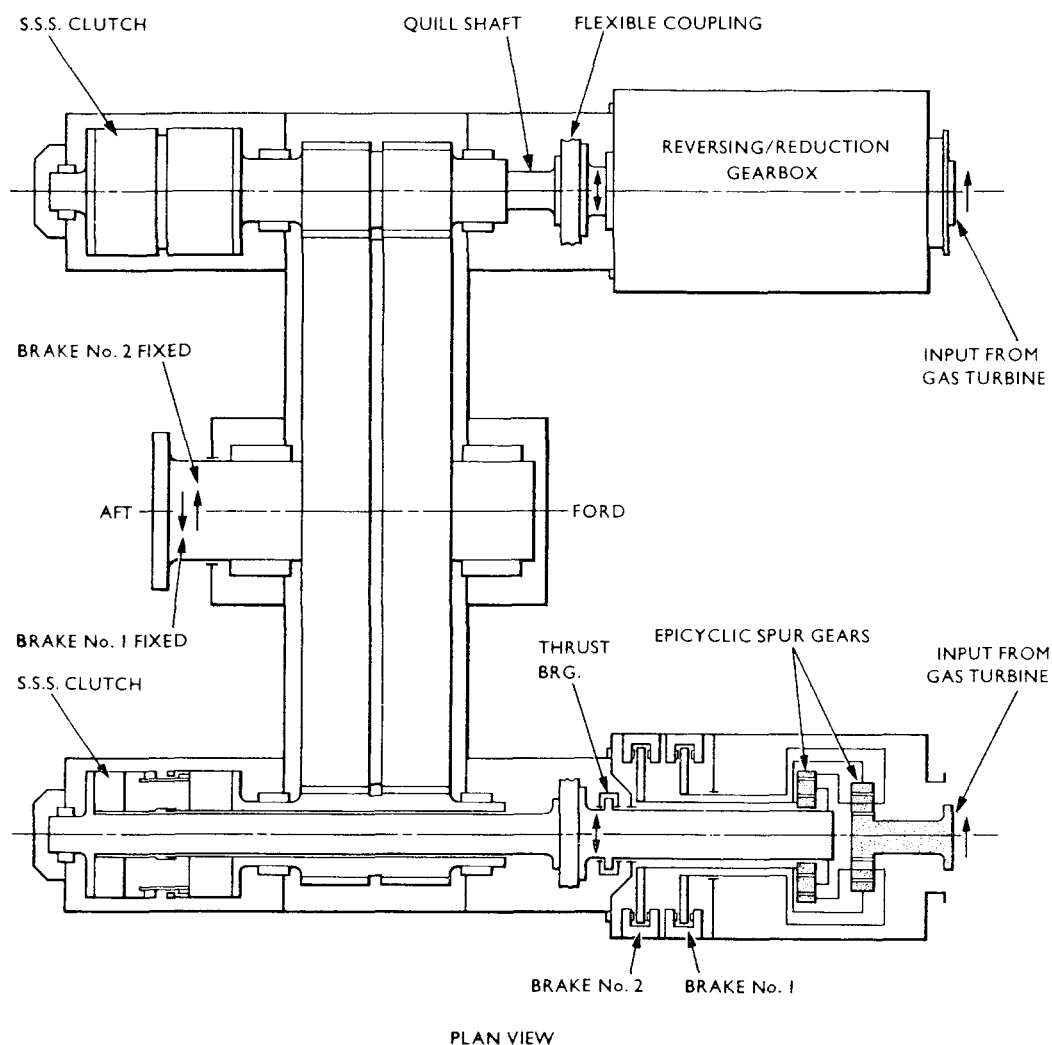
VICKERS LTD. PROPOSAL FOR CAH GEARS USING TWO PRIMARY REVERSING EPICYCLIC GEARBOXES
